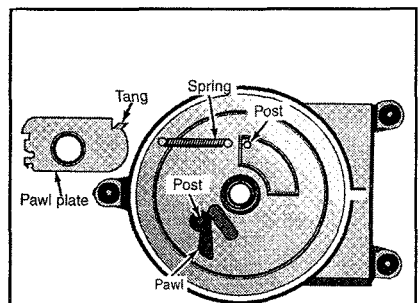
The pawl plate return spring is positioned between the plate tang and pulley post
